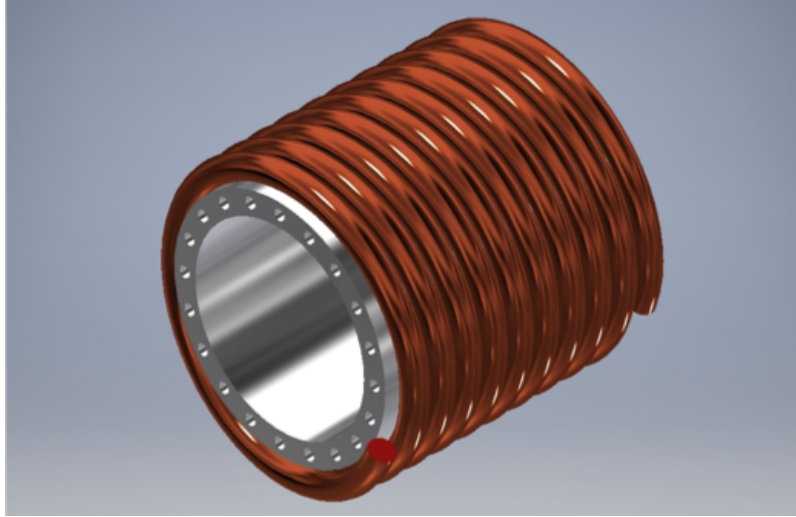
Hybrid cradle design featuring heat pipe holes and wrapped copper tubing for coolant circulation.
